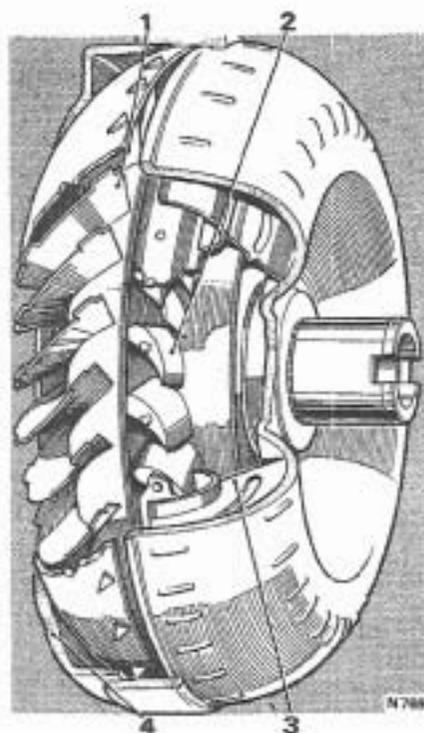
TORQUE CONVERTER—CUT-AWAY VIEW
